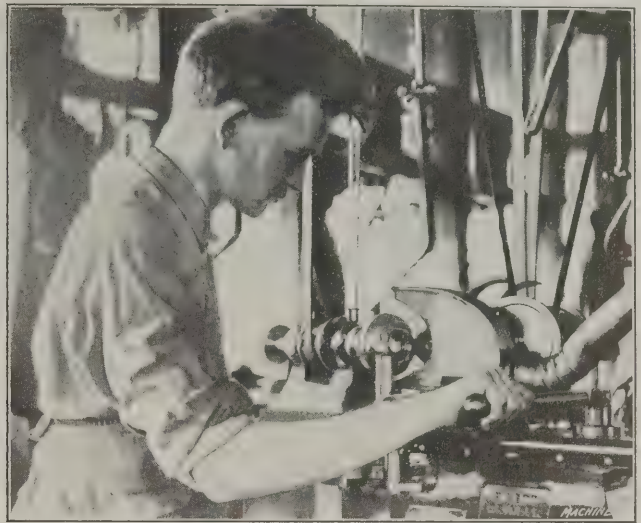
Grinding the Spherical Faces of Bevel Gear Pinions
